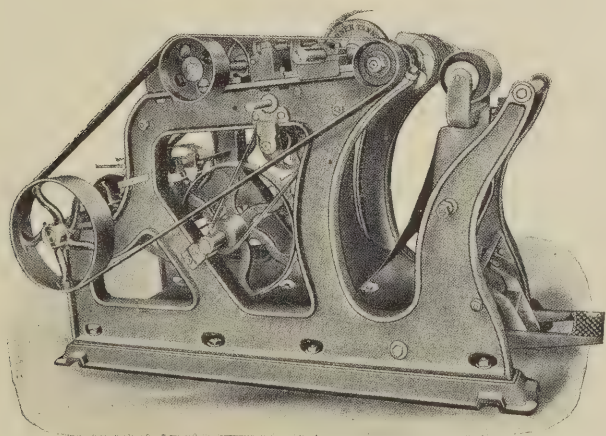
Shaving machine—the Turner Tanning Machinery Company
